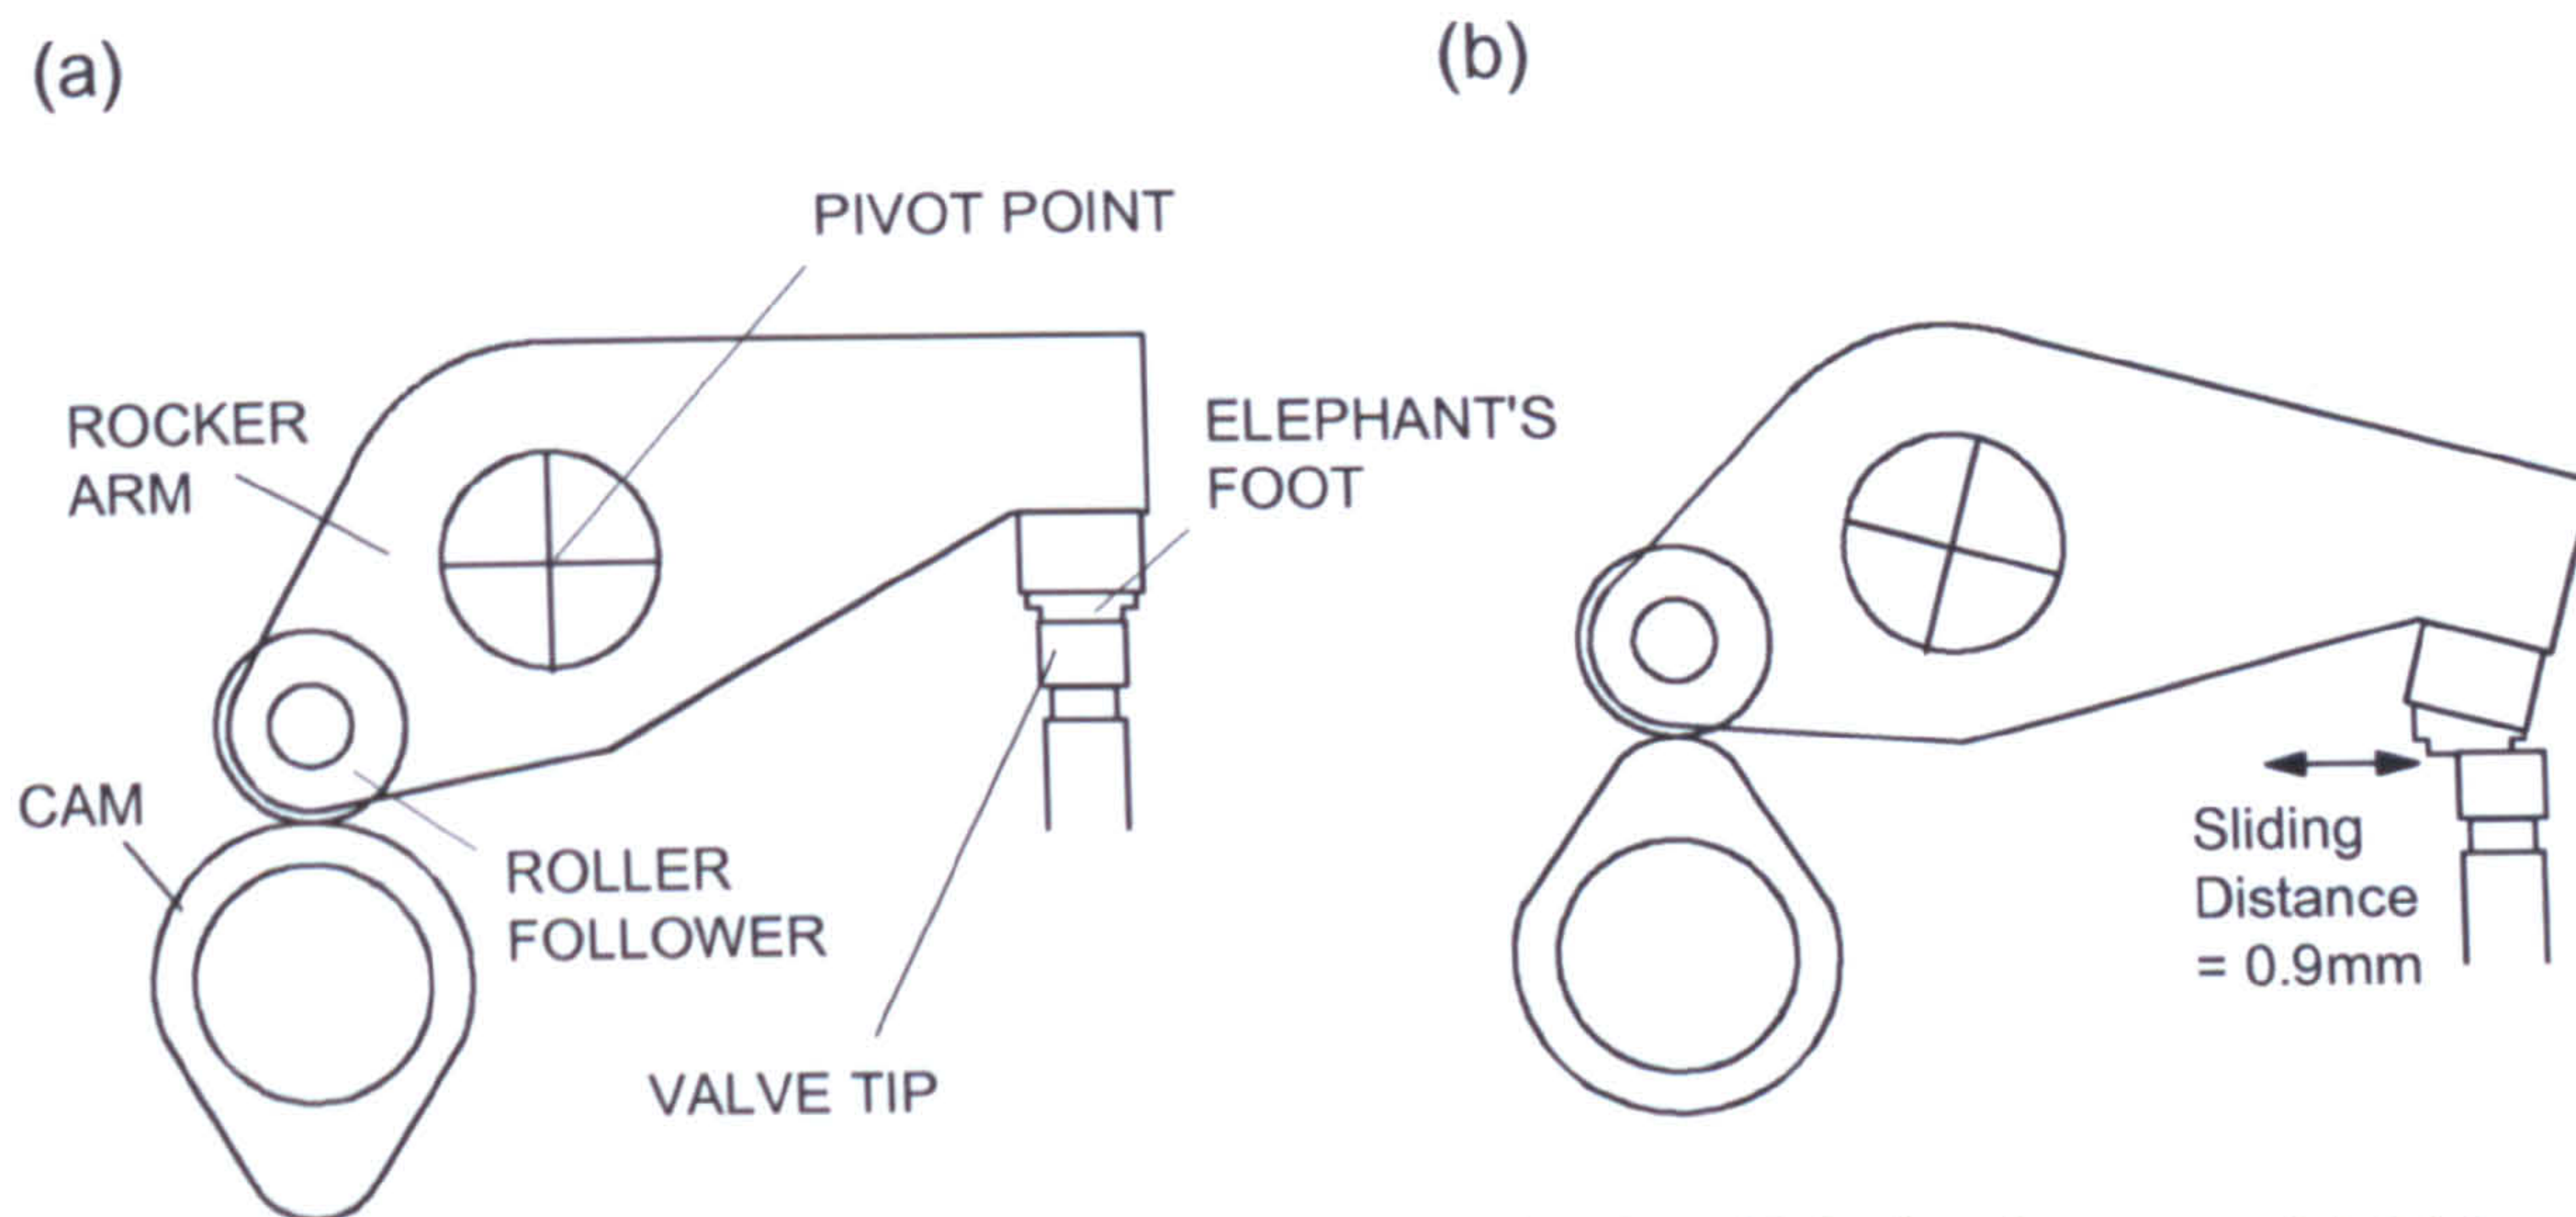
Rocker Arm Dimensions and Magnitude of Motion between (a) Valve Closed Position and (b) Valve Closed Position.
